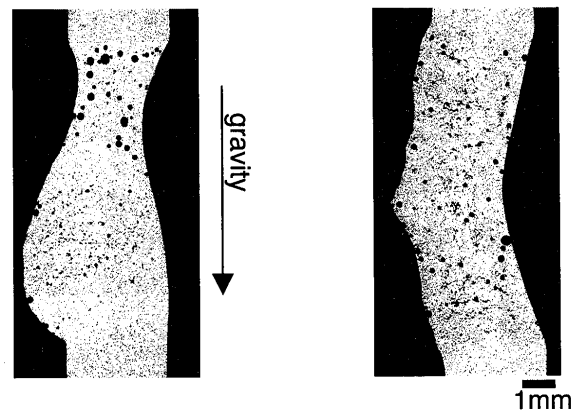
Transverse sections of bead-on-plate welds in horizontal welding with argon-1% hydrogen mixed shielding gas.
